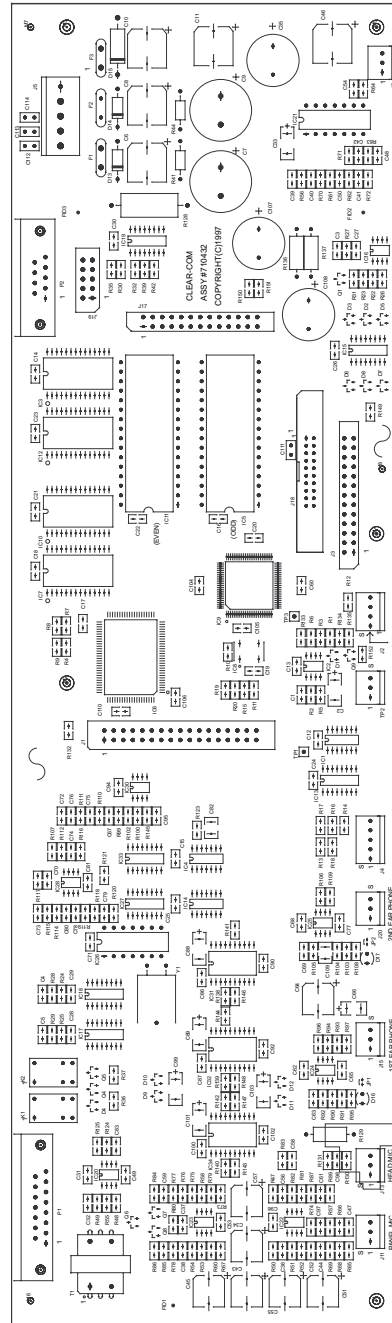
Assembly Drawing—ICS-2003 Main PCB
